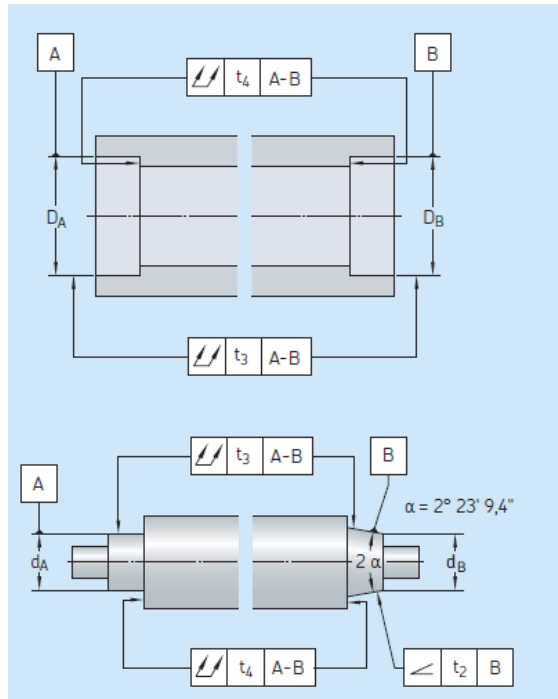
Bearing seats geometrical tolerances [34]
